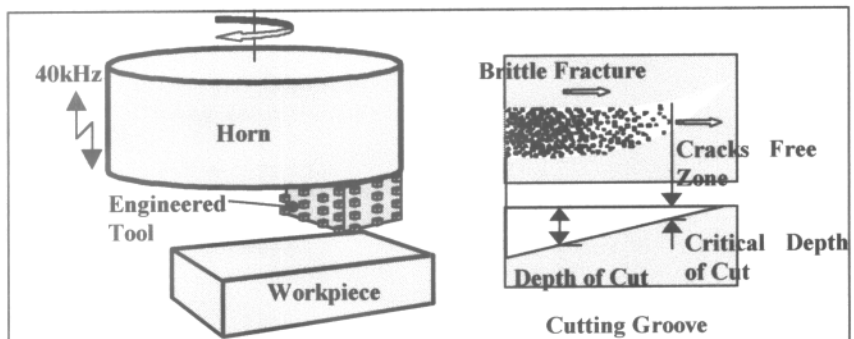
Schematic drawing Fly-cut experiment using Engineered
